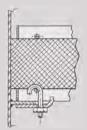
Horizontal demister Fixed from below Using Hookbolts & clmps
